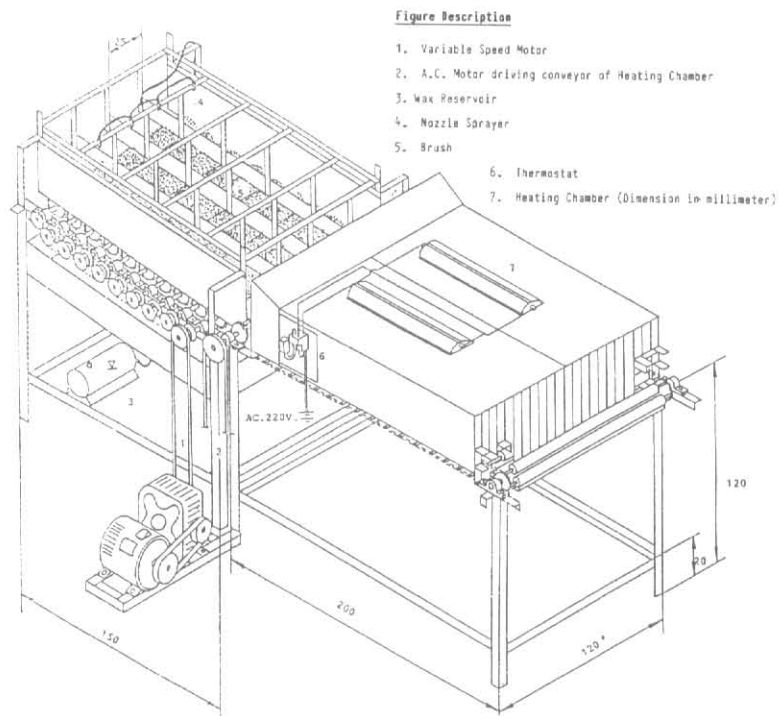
Three dimension schematic diagram of waxing machine. (Description: 1-variable speed motor; 2-A.C. motor driving conveyor of heating chamber; 3-wax reservoir; 4-nozzle sprayer; 5-brush; 6-thermostat and 7-heating chamber) (Dimension in millimeter).
